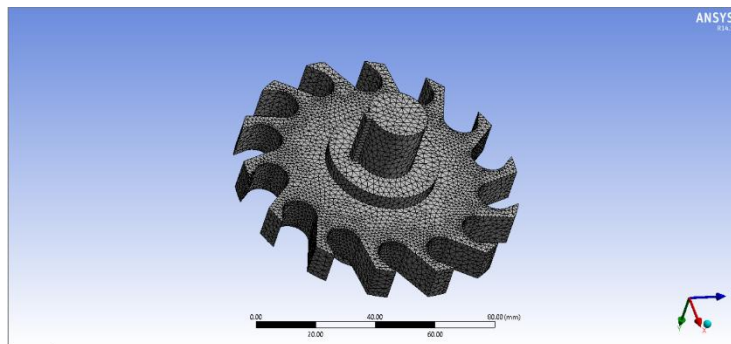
Solidwork Model of Cutting Tool Imported in IGES Format in ANSYS for Analysis
